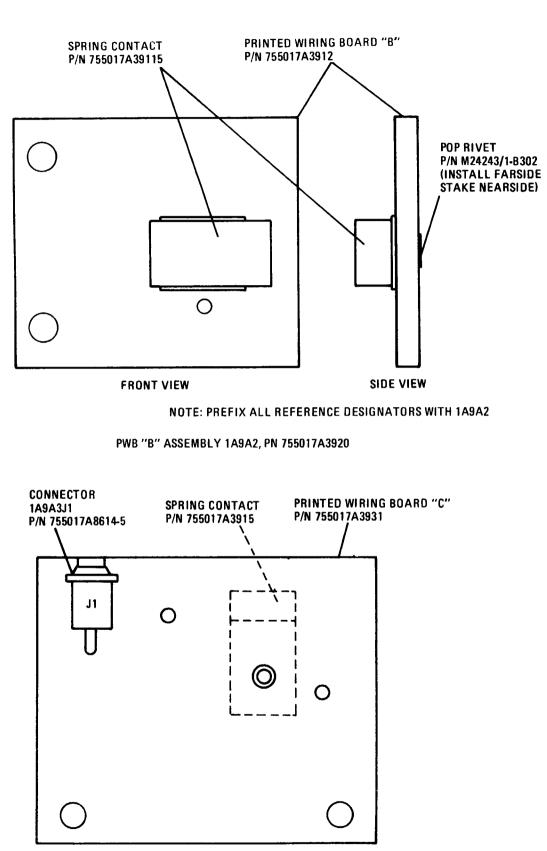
Plate Assembly 1A9, PN 755017A3900 (Sheet 1 of 2)
